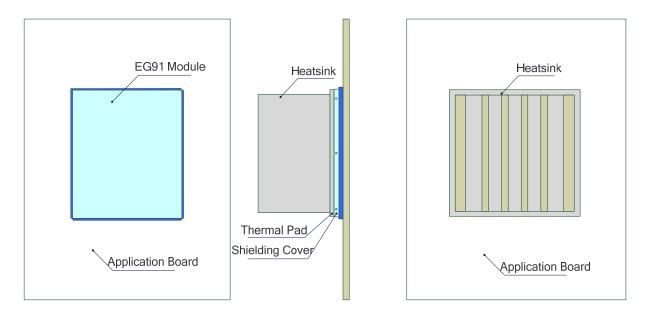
Referenced Heatsink Design (Heatsink at the Top of the Module)
